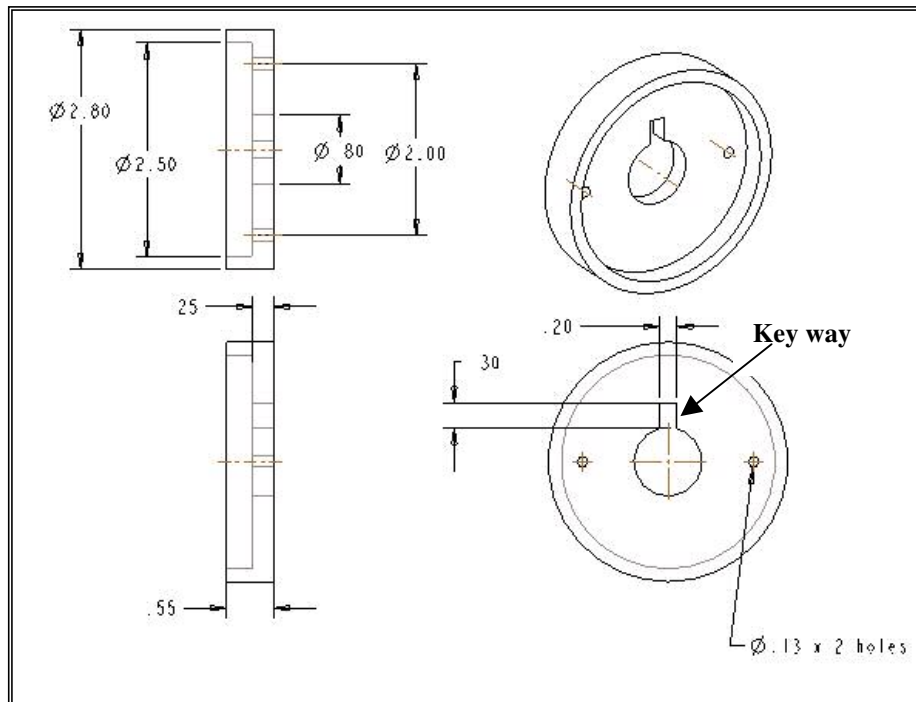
Multiview drawing of plate holder with dimensions
